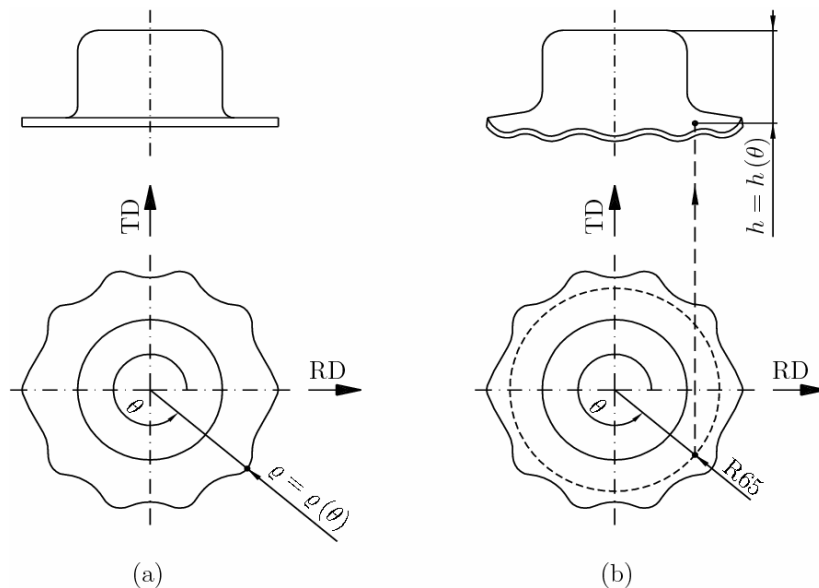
NUMISHEET 2002 deep-drawing benchmarks - characteristics of the flange (AA6111-T4 sheet metal; 1 mm thickness)
